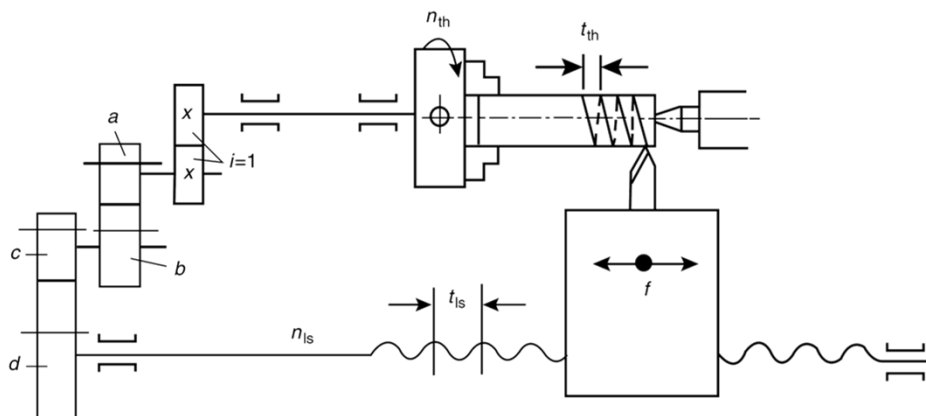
Setting up the engine lathe for thread cutting.
